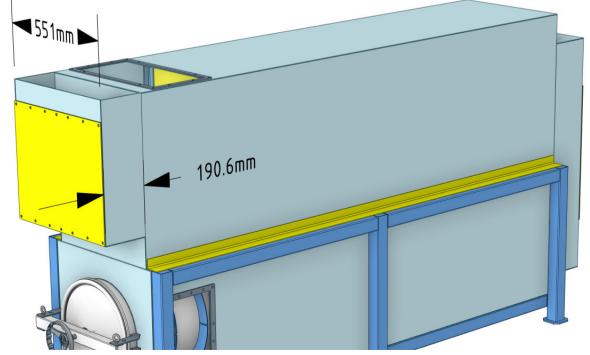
Exhaust zone, from where the exhaust gases leave the equipment to a chimney.
